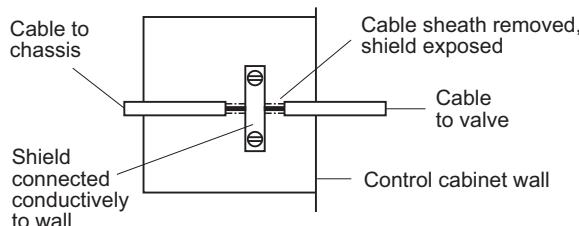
Connecting the shield to the control cabinet's wall (detail A from Fig. 32)
